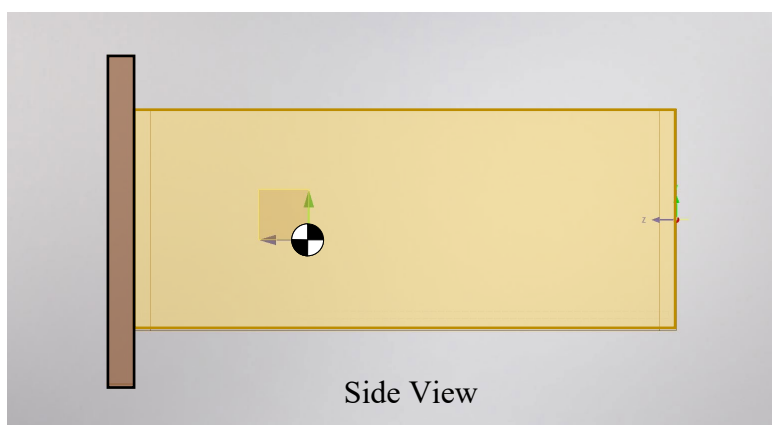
The larger front on this drawer causes the drawer's CG to be closer to the front than the back.
